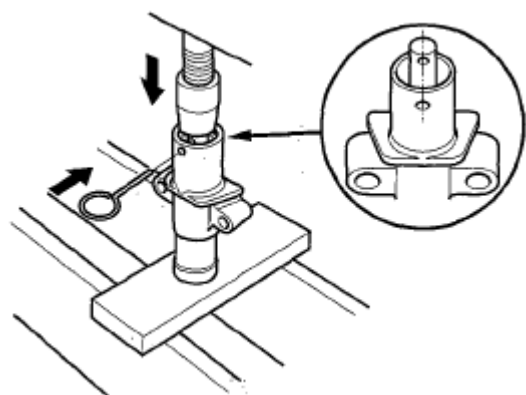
Identifying Holes On Rod And Housing Of Auto-Tensioner
